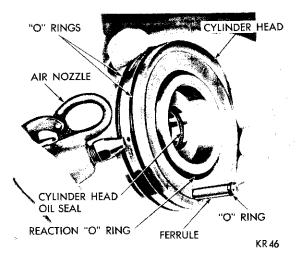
Removing Reaction Ring Seal From Cylinder Head
